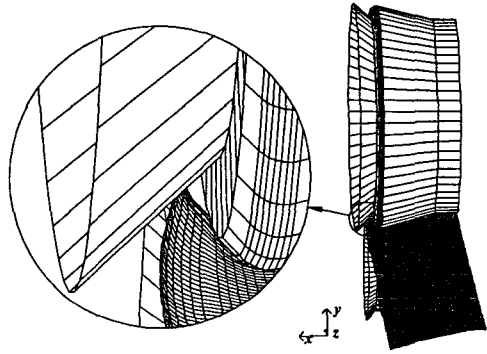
Deformed shape of the strip when its front enters the 3rd stand with TYPE II forming rolls
